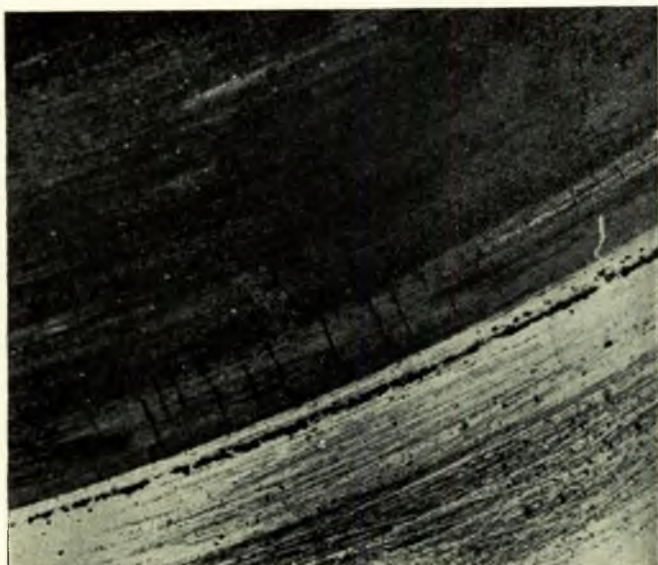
Radial cracks on thrust face of No. 4 crankpin after crack detection (Case II)
